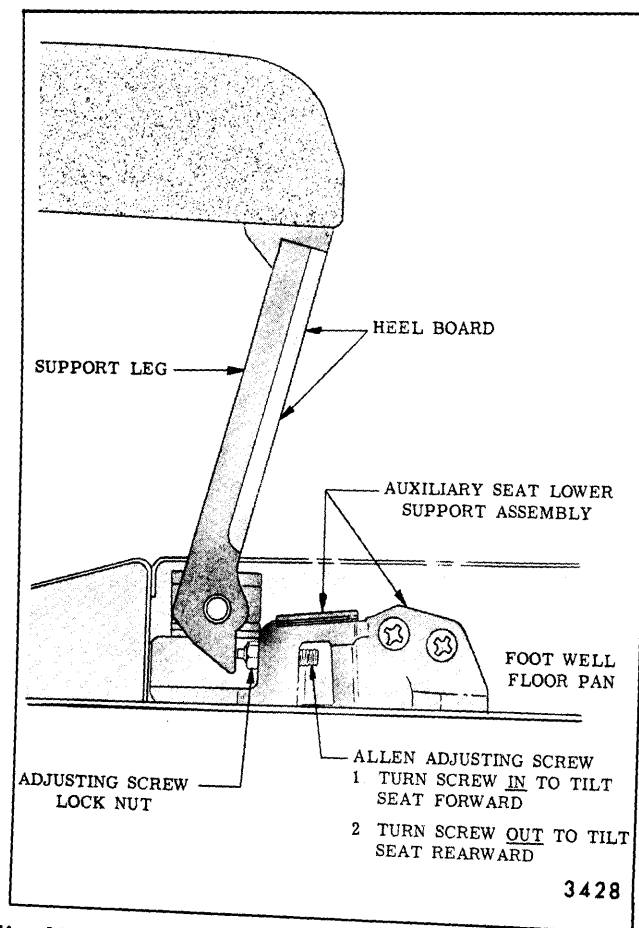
Auxiliary Seat Adjustment - Cadillac Limousine Styles
